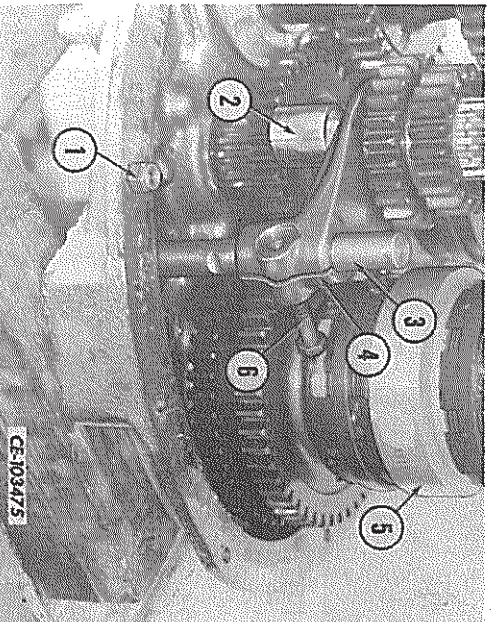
Removing the Hi-Lo Shifter Shaft
